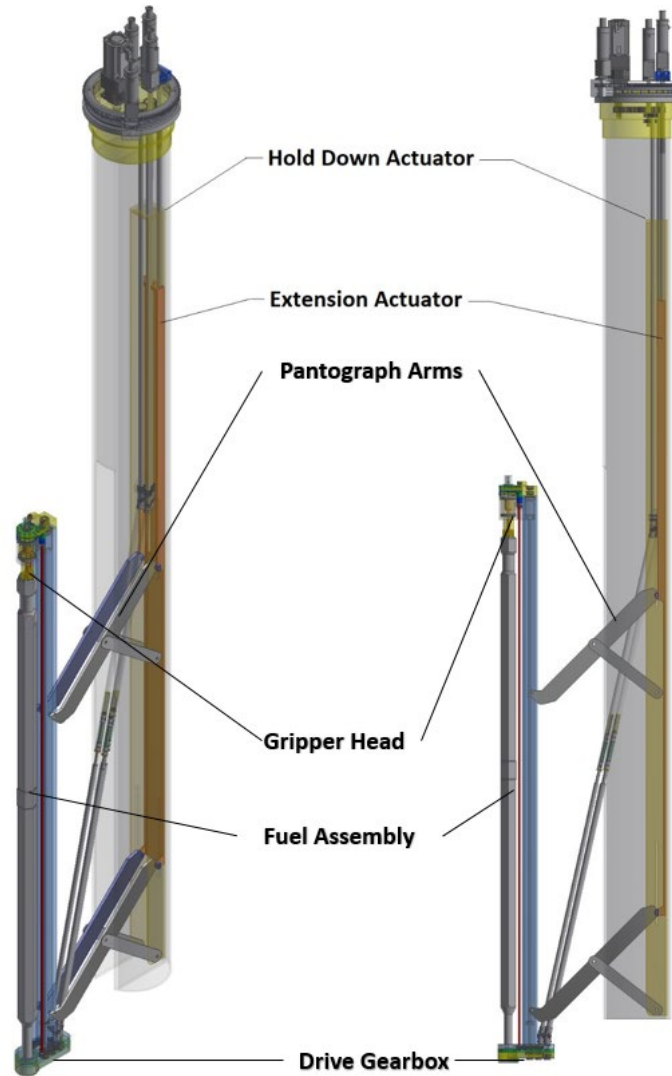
Overview of the ANL Compact Fuel Handling Machine.
